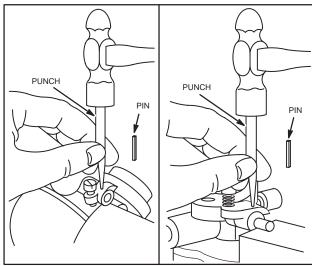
REMOVE THROTTLE SHAFT AND BUSHINGS
